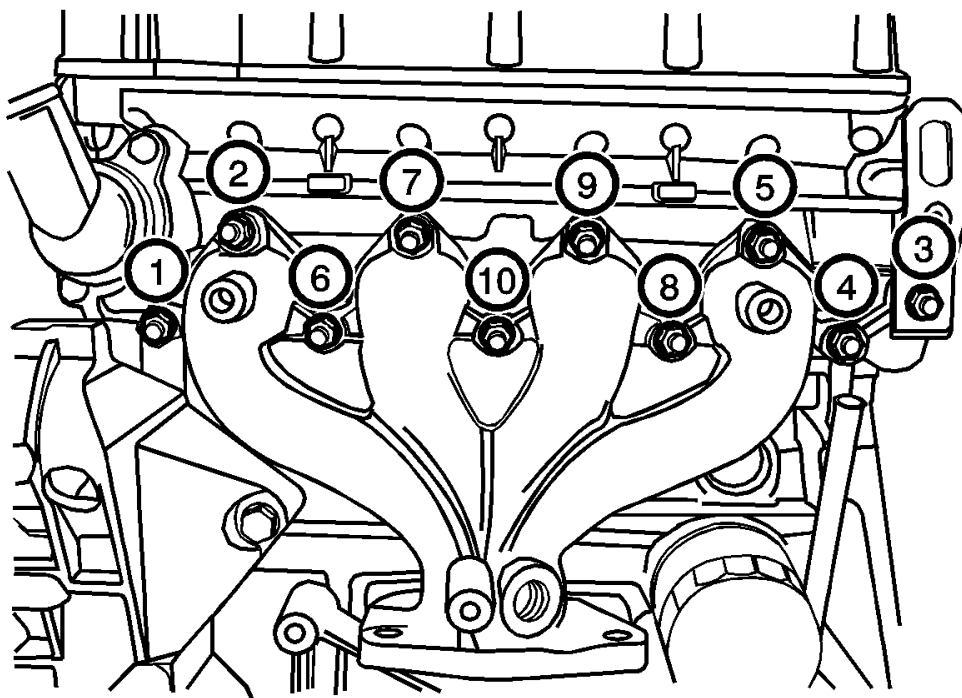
Exhaust Manifold Retaining Nut Removal Sequence
